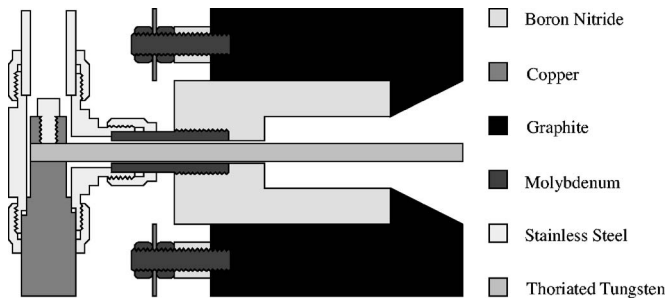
Schematic drawing of standard coaxial MPD thruster.
